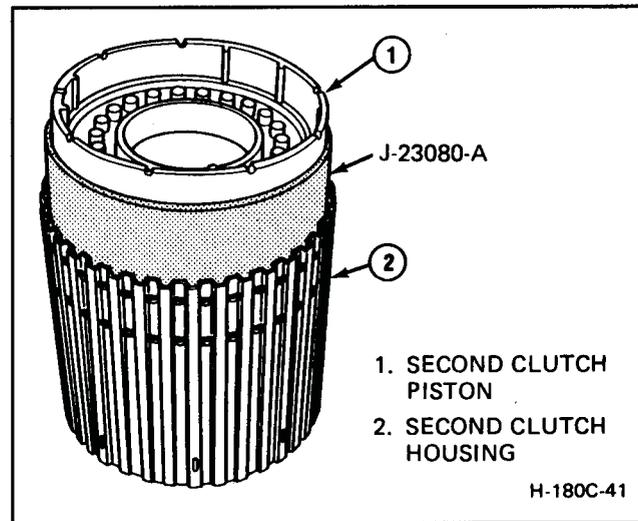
C-53 Installing Second Clutch Piston Into Second Clutch Drum
